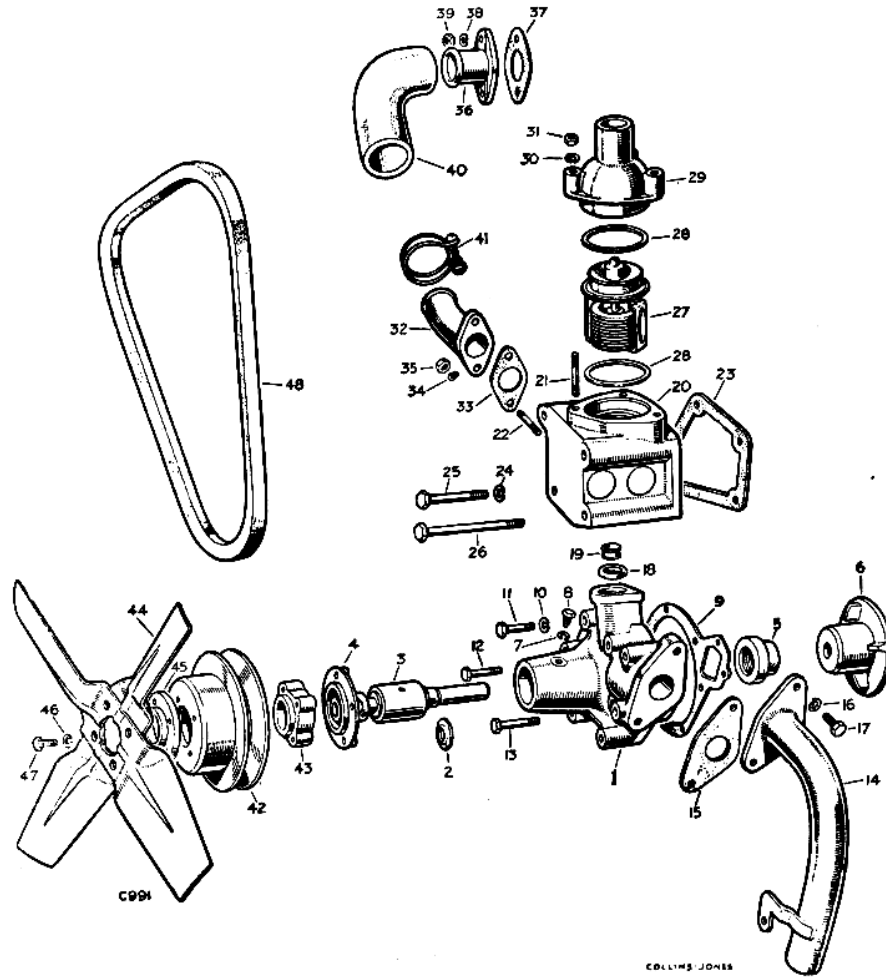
Layout of water pump, thermostat and coolant pipes, Petrol Models.
